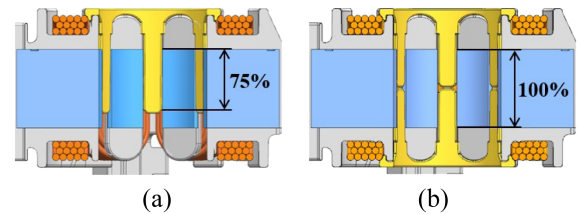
Contact length between a cage-ring and a stator core. (a) 75% contact; (b) 100% contact.
